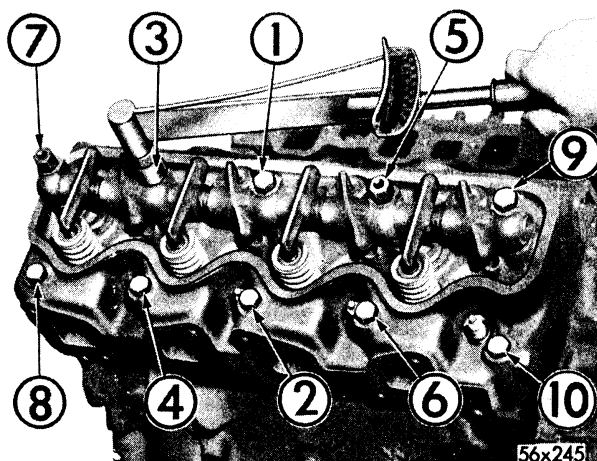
Tightening Cylinder Head Bolts (SpitFire)
